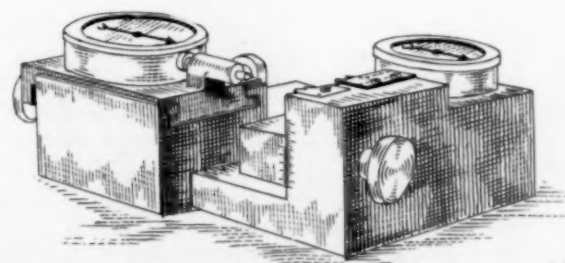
GAGE WITH DIAL INDICATOR READINGS
